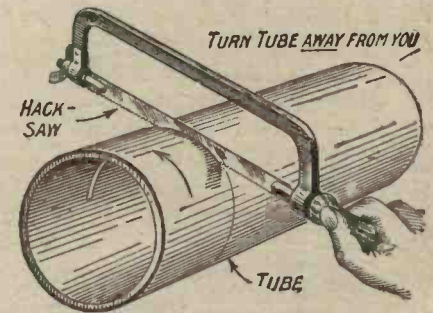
When cutting cardboard or ebonite tubing the tube should be turned away from the body.
